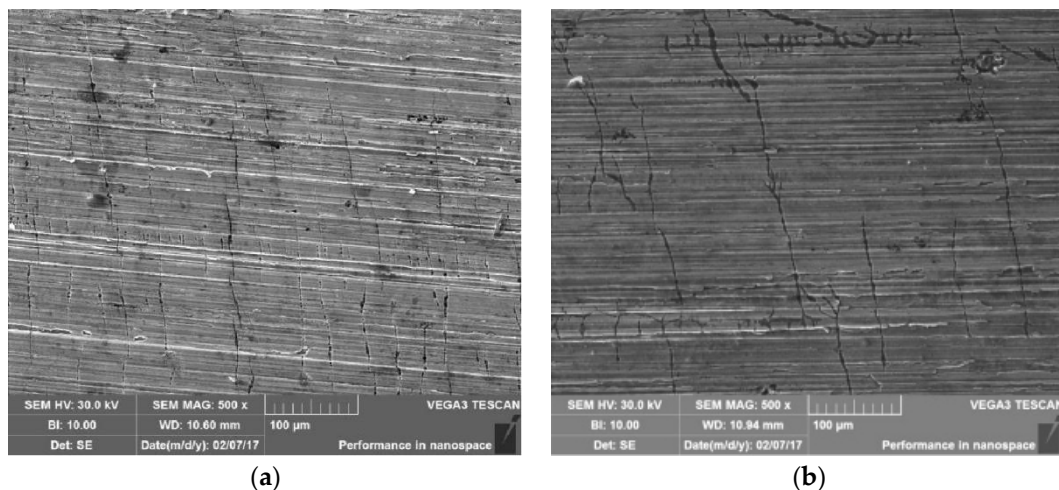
Crack morphology: (a) bending section; (b) straight edge.
